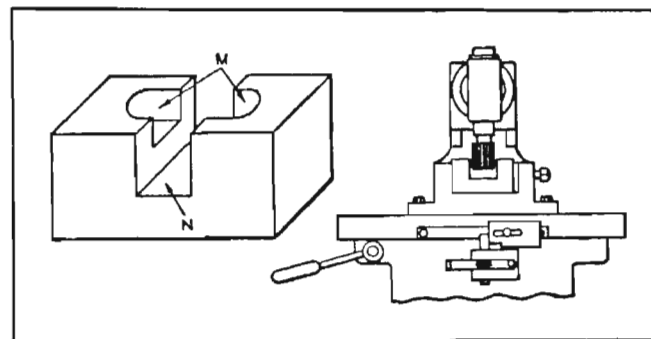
Automatic Work-locating Mechanism. (Left) Work is End-milled as Indicated at *M*; (Right) Milling Machine with Fixture and Locating Attachment.
